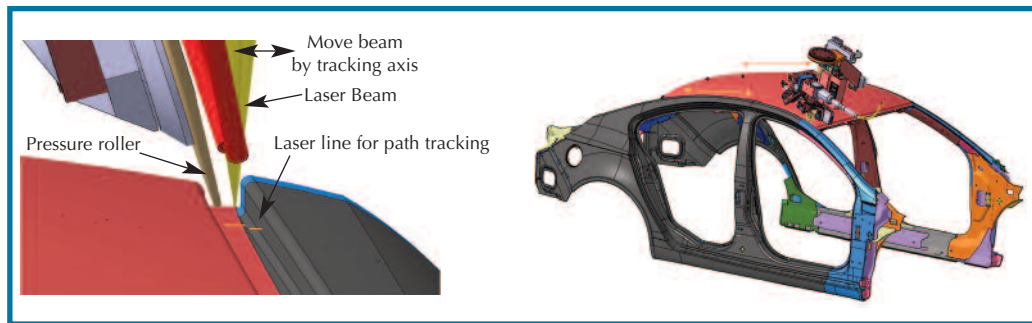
When combined with the coaxial LPF seam tracking system, the welding head can compensate for positioning errors, roof flange cutting edge tolerances and any robot trajectory deviations. This guarantees a constant, precise and accurate weld seam. A pressure roller running collateral to the laser focal point presses the sheets together during welding.
